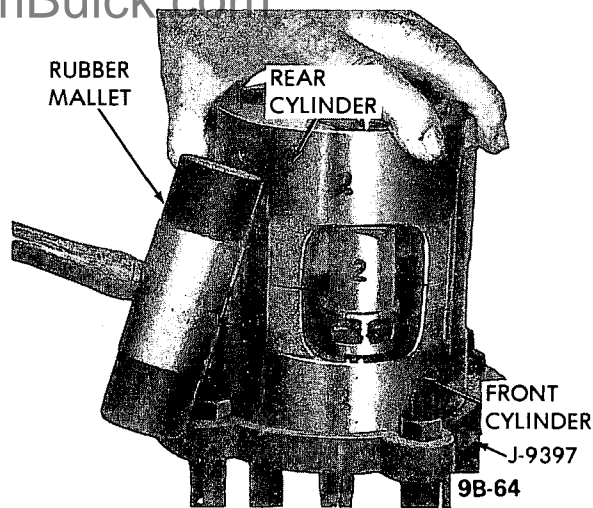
B-90 Separating Cylinder Halves - 6 Cylinder Compressor
